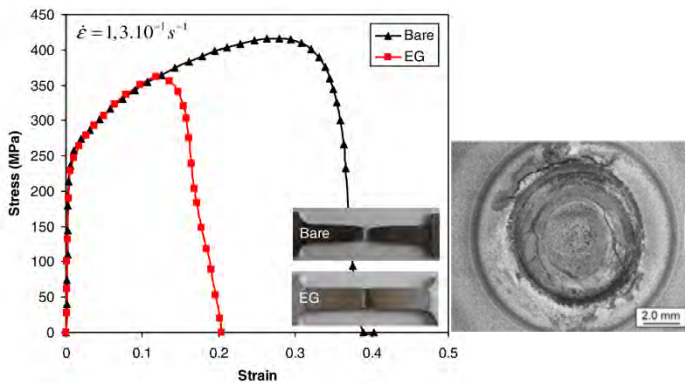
Left: Tensile curves of bare and electrogalvanized (EG) TWIP steel specimens at 700°C [1] Right: Spot weld with surface cracks due to LME [2]
